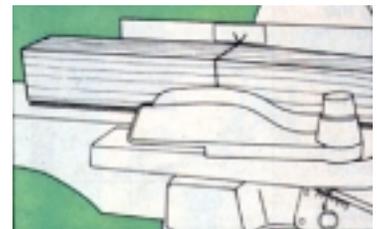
Tapering the spindle stock before turning. Leave bottom 8" square.
